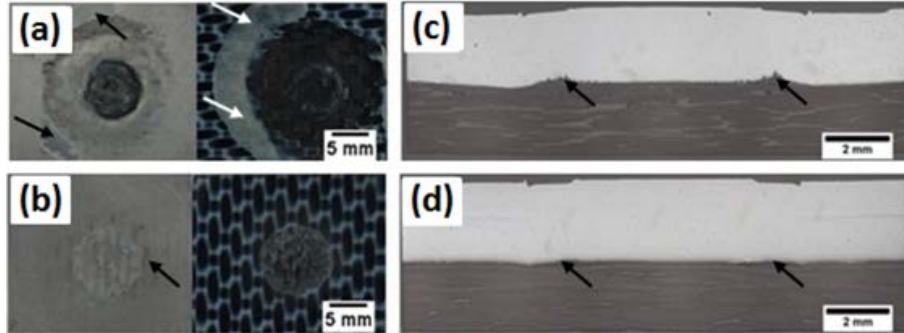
Fracture surface of the joints after lap shear testing: (a) condition 3; (b) condition 1. Macrostructure of the joint cross-section: (c) condition 3; (d) condition 1.
